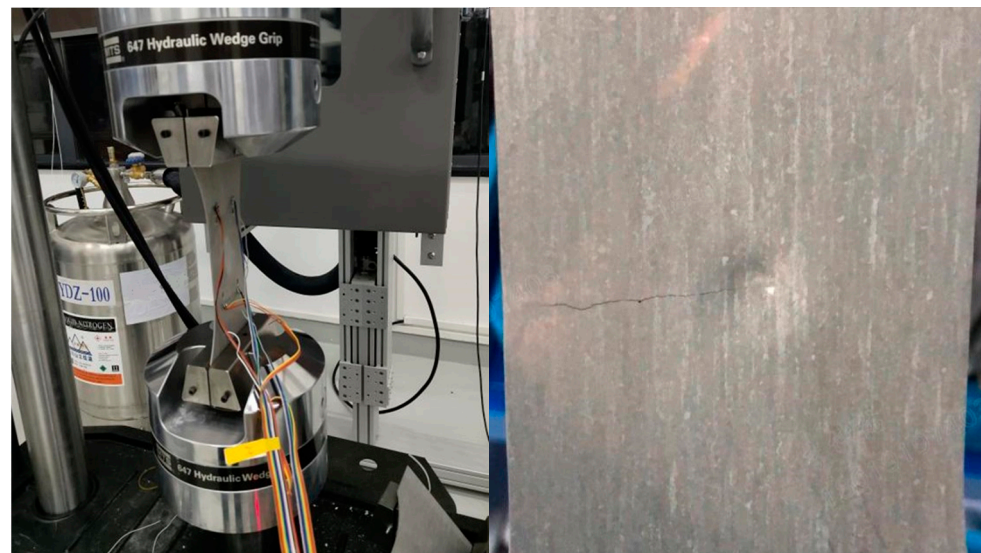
Fatigue testing machine and fatigue fracture morphology of a specimen with an impact pit.
